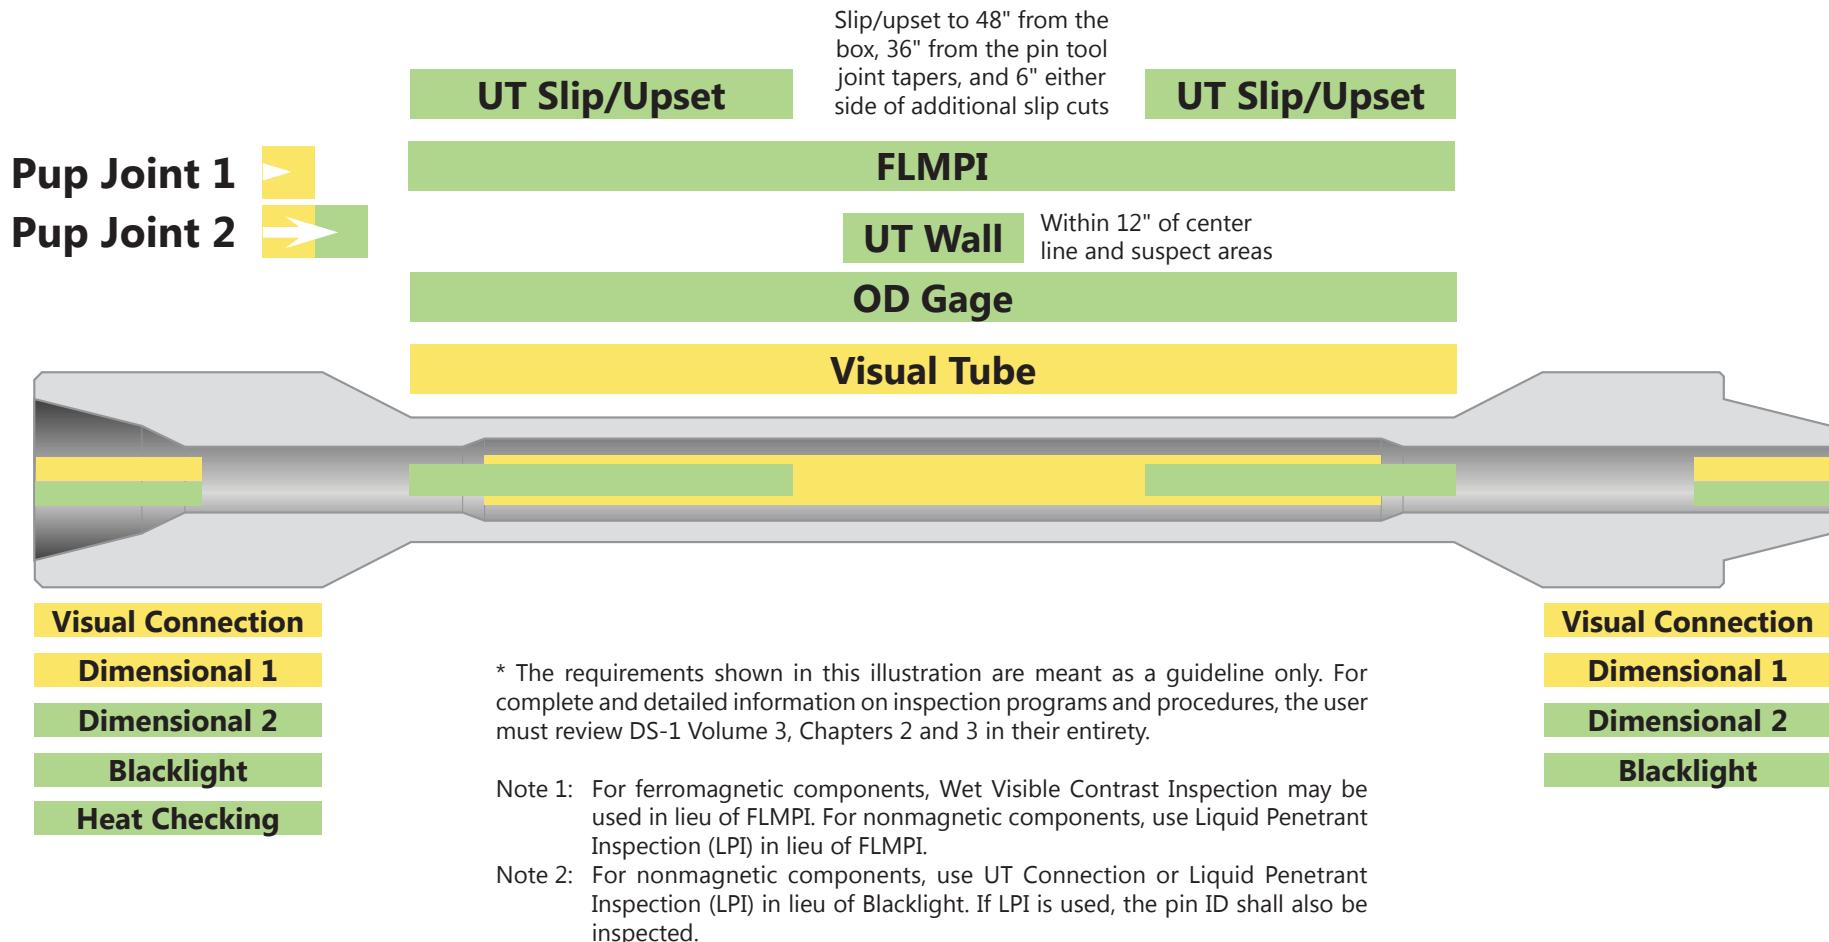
Welded Pup Joint Inspection Program
